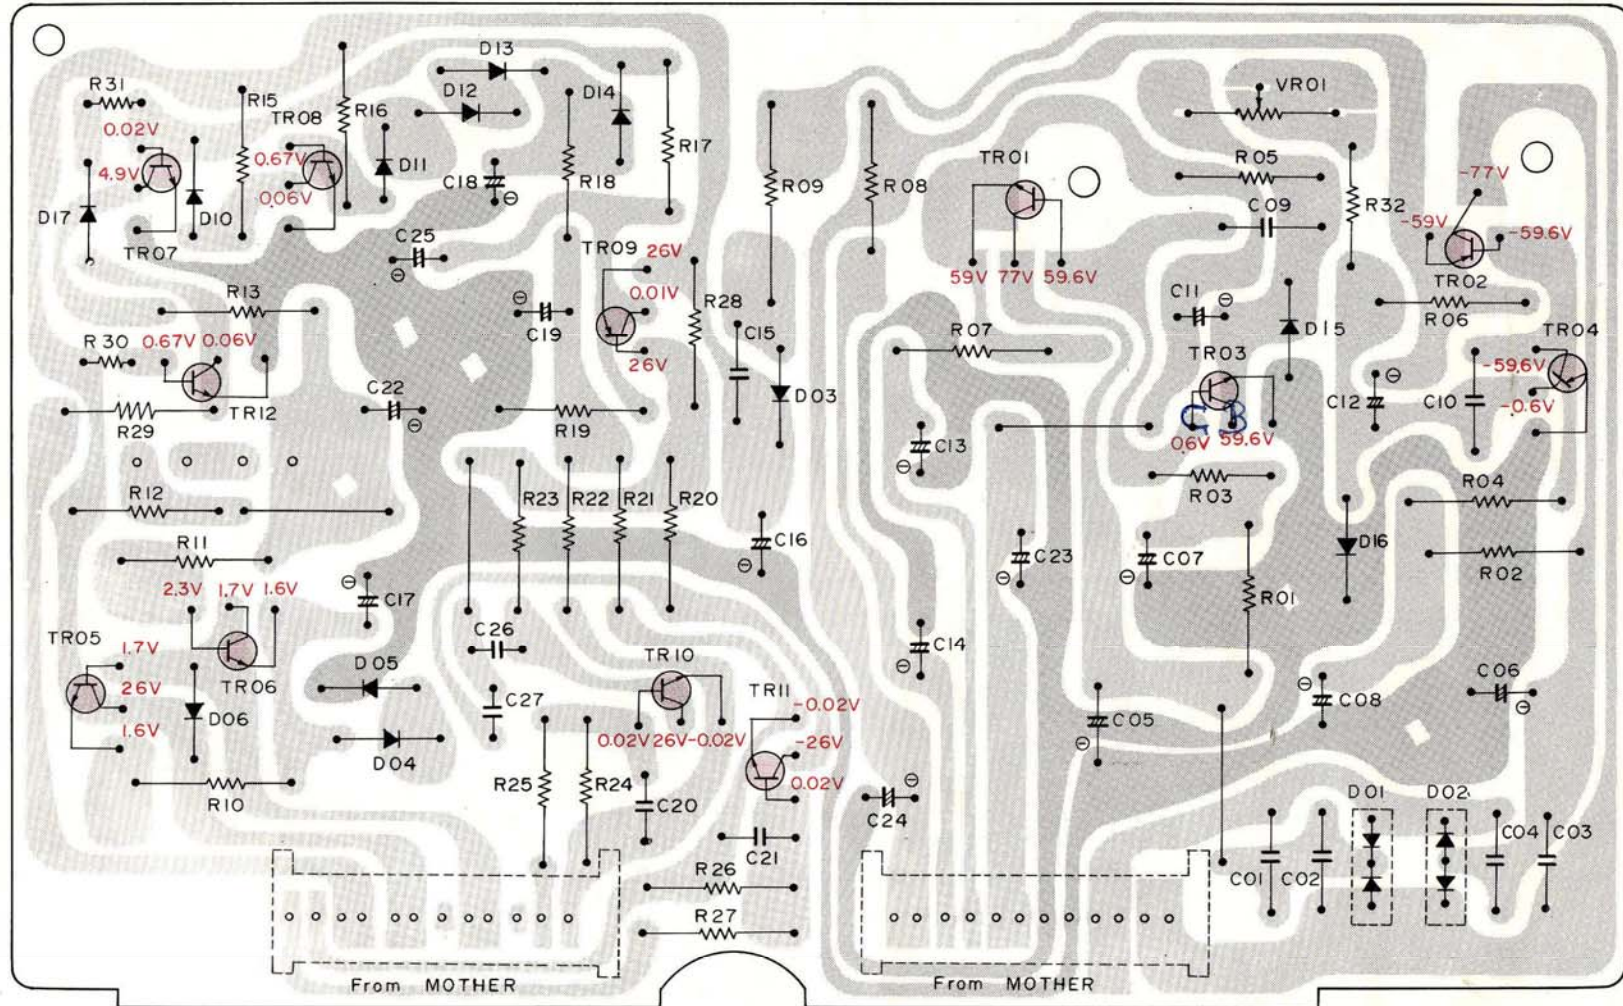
Solder Side of Supply Protector Amplifier P.C. Board (SPLY-C34)
